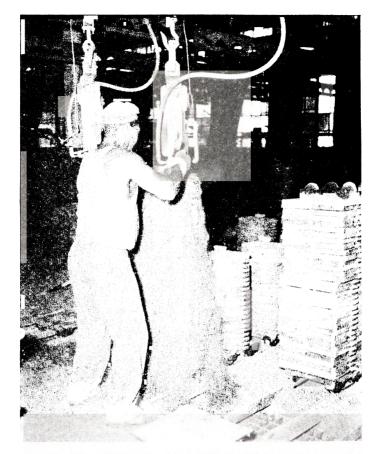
Shakeout of castings using a pneumatic vibrator hoist. Sand falls through grillwork in floor onto conveyor belt which carries it to the sand conditioning unit.
